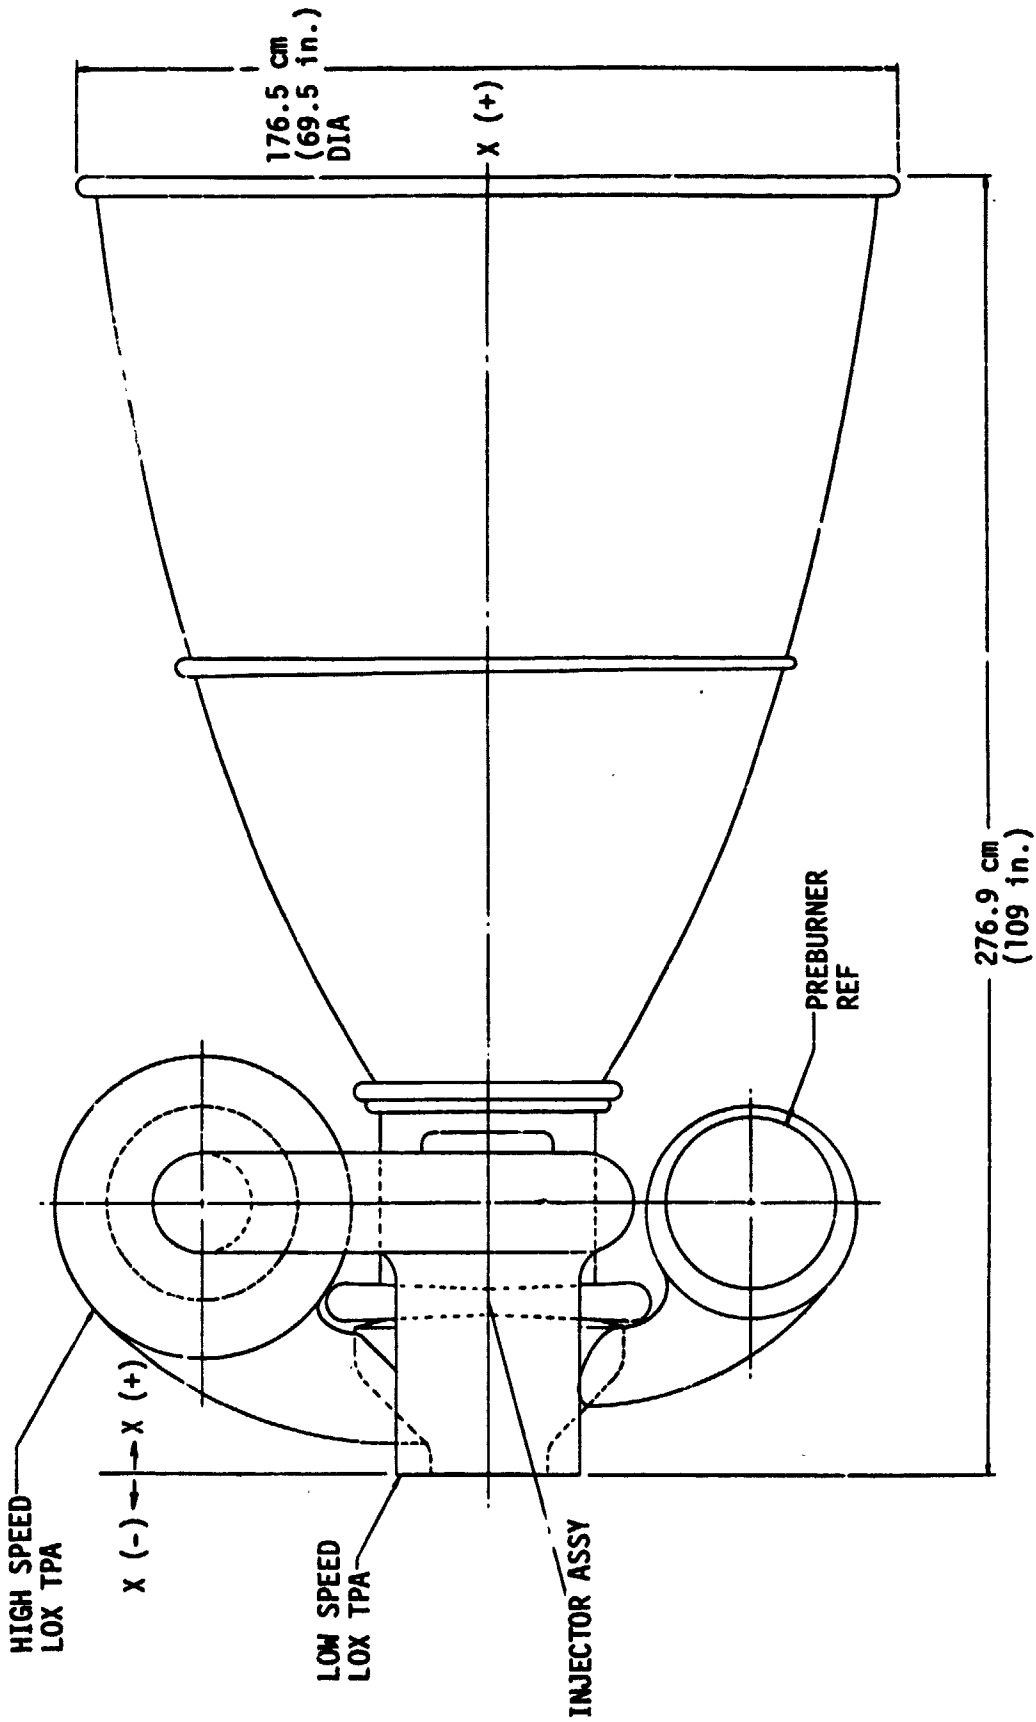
Mode 1 LOX/RP-1 Baseline Engine Assembly (Side View)
